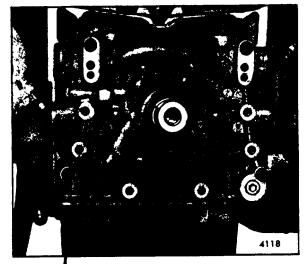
Engine Front Cover Mounting (Lower) -- 6V-Engine.
